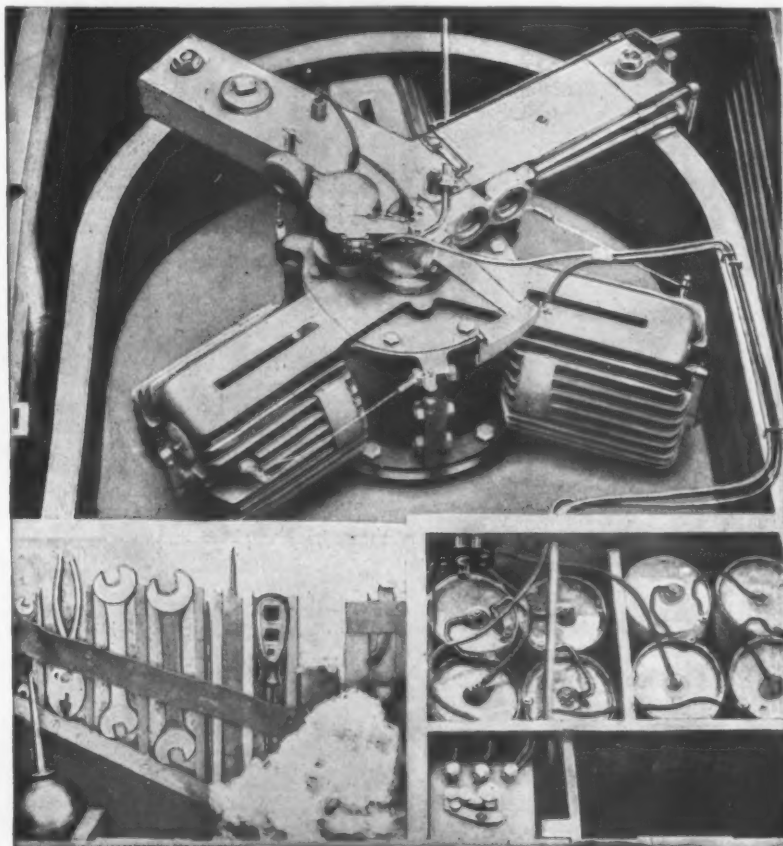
View of the Motor, Tools and Batteries in the Rear of a No. 5 Adams-Farwell Car.
